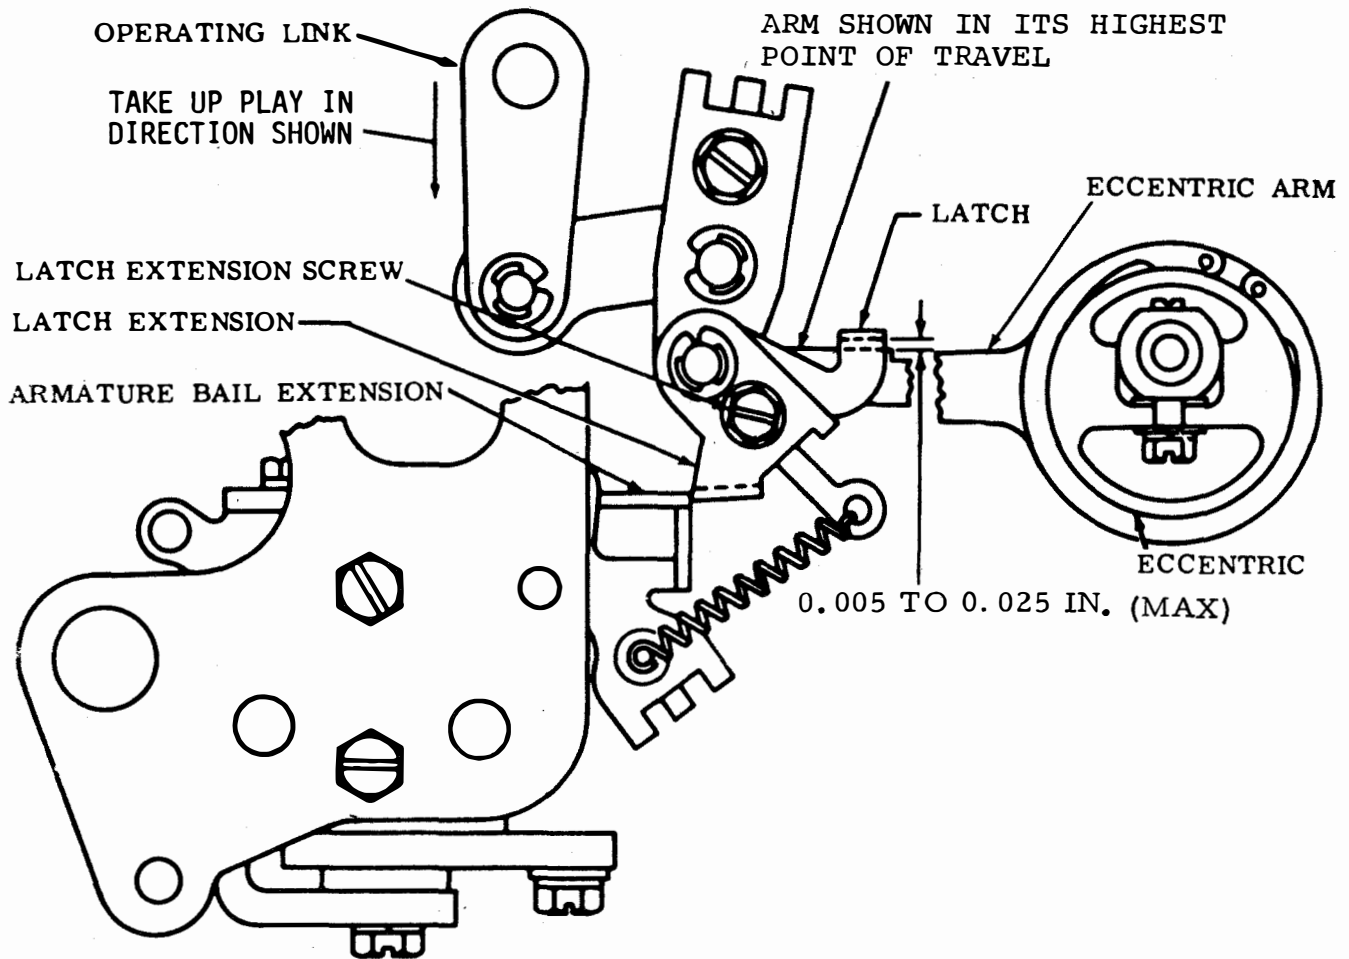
Power Driven Backspace Mechanism Latch, Perforator 6-734
